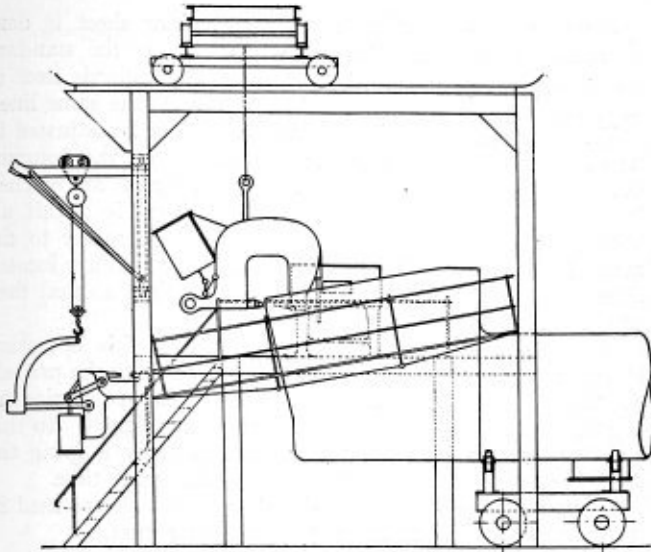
Arrangement of Equipment for Riveting Up Mudring
